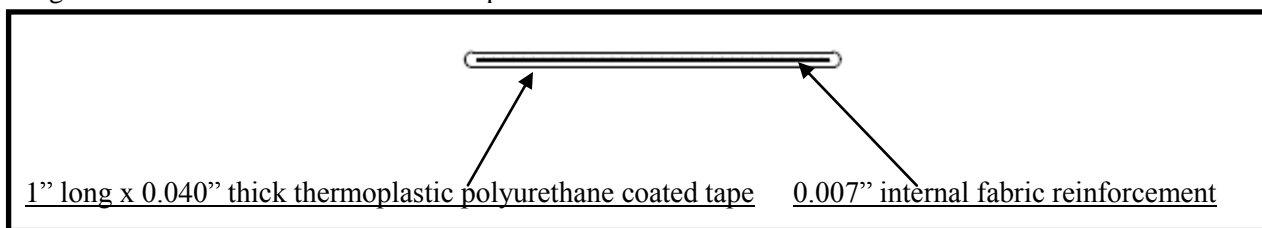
2" Reinforced Sealed Tape Cross-Sectional View
